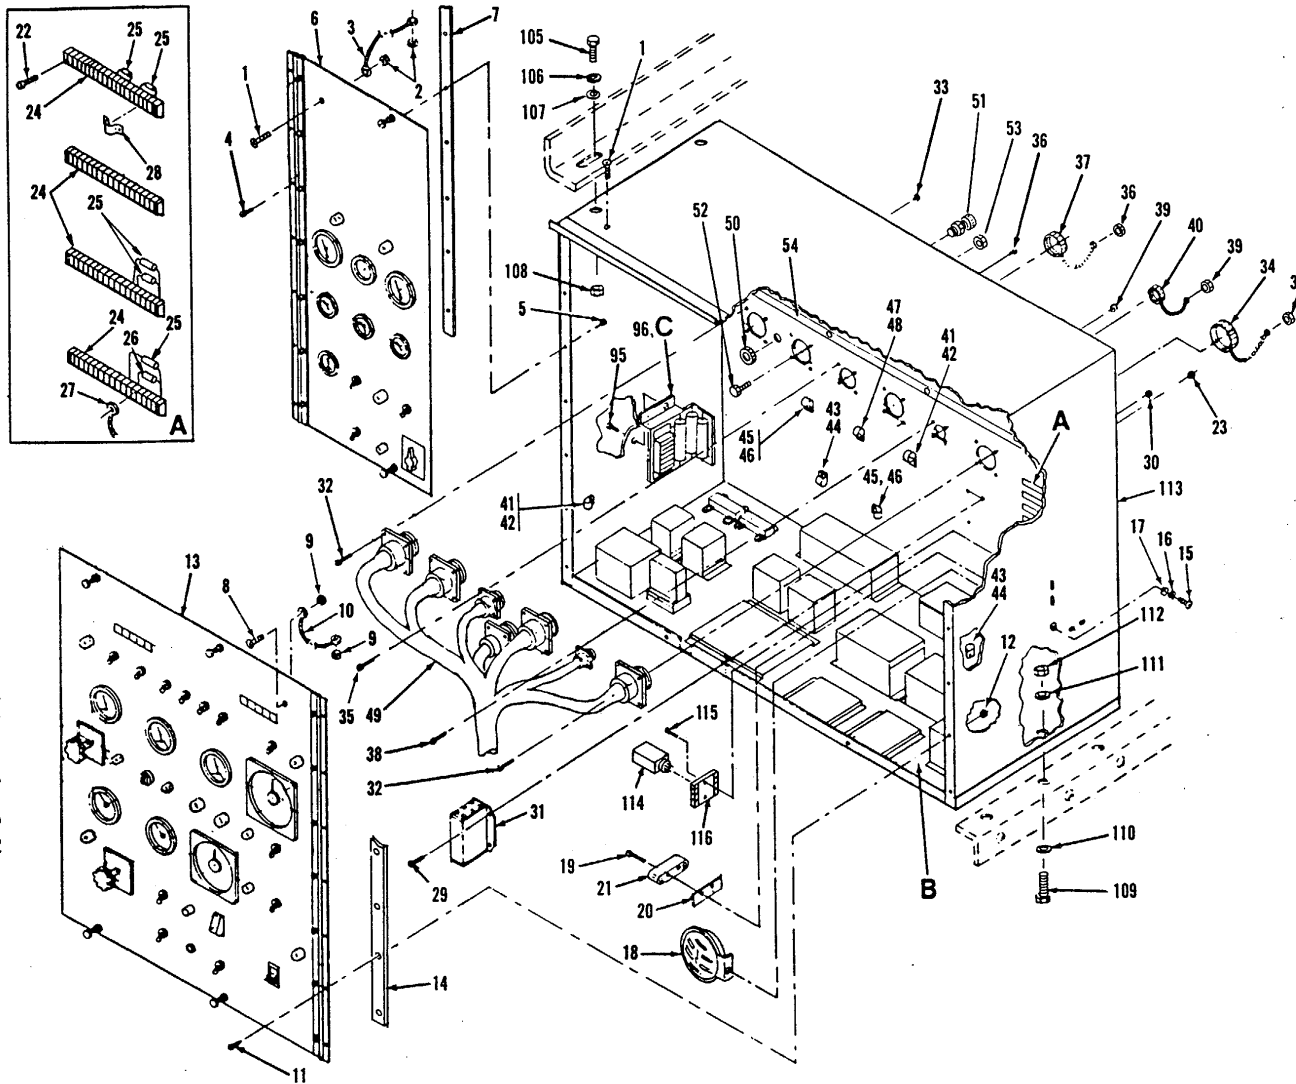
Control Cubicle, Exploded View (Sheet 1 of 2 )
